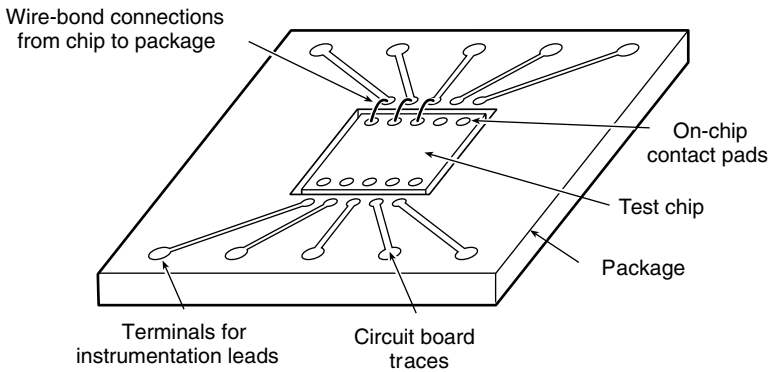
Test chip located in a wire-bond chip carrier or package, showing connecting leads wire-bonded between the chip contact pads and the package terminal pads. (The density of contact pads is typically much higher than that shown in this simplified sketch.)
